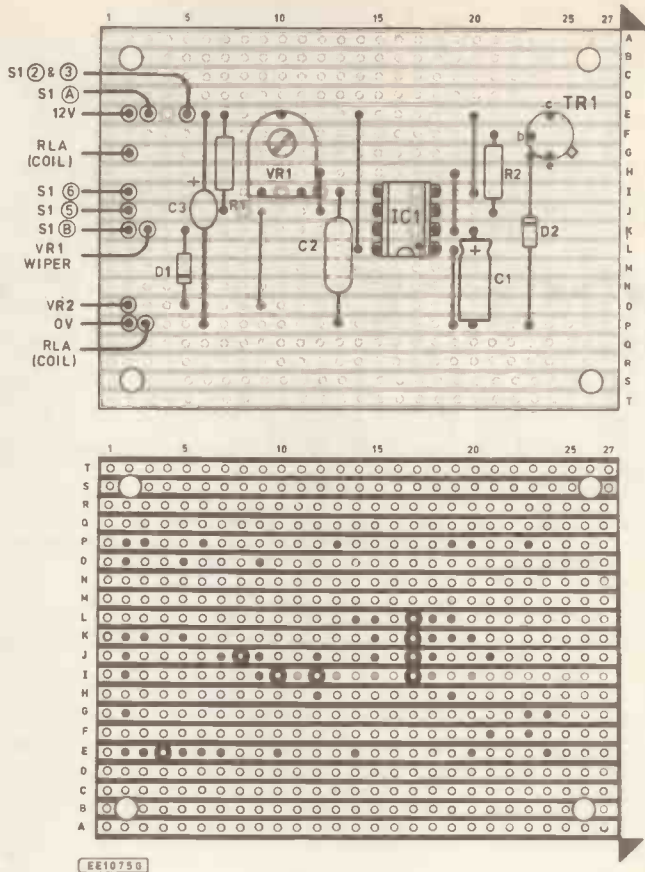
Veroboard layout and wiring for the car wiper controller.
